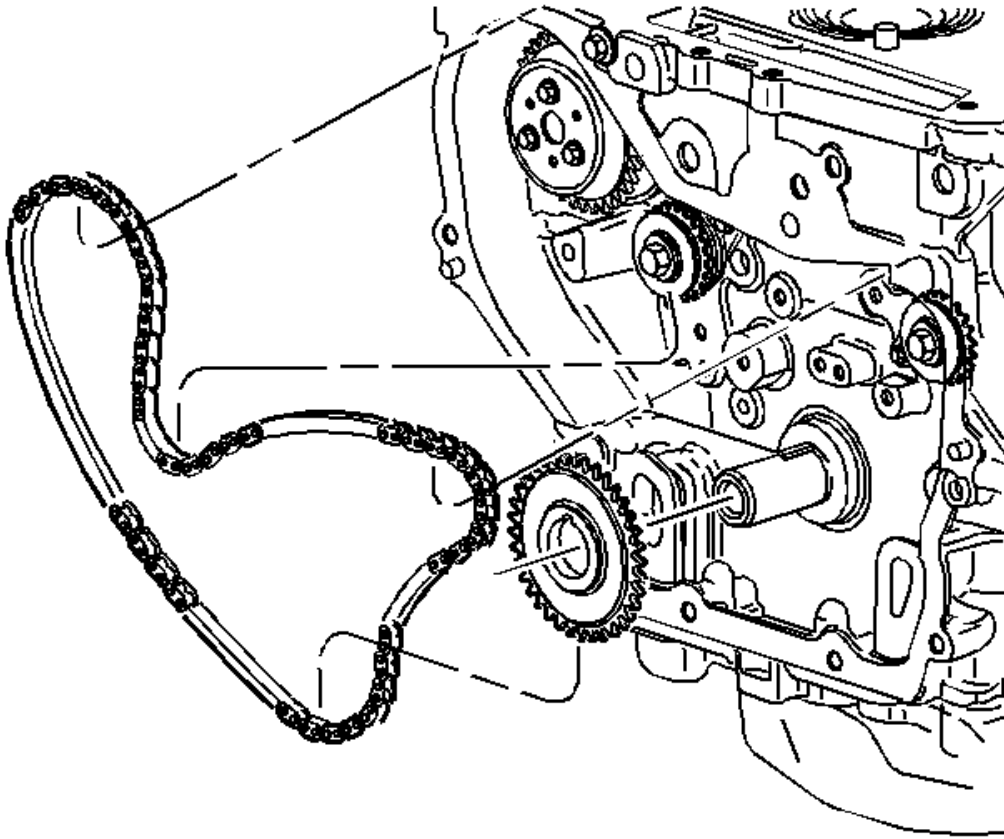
Identifying Upper Balance Shaft Drive Chain/Sprocket
